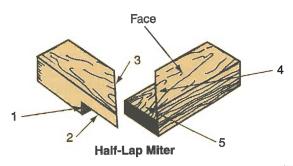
Cuts taken to make a half-lap miter. (Delta International Machinery Corp.)
